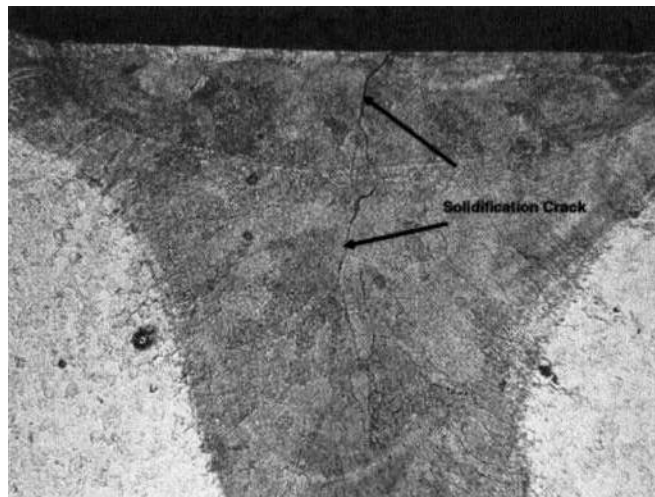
Cross-section of laser welded Ti-rich Nitinol [51]
